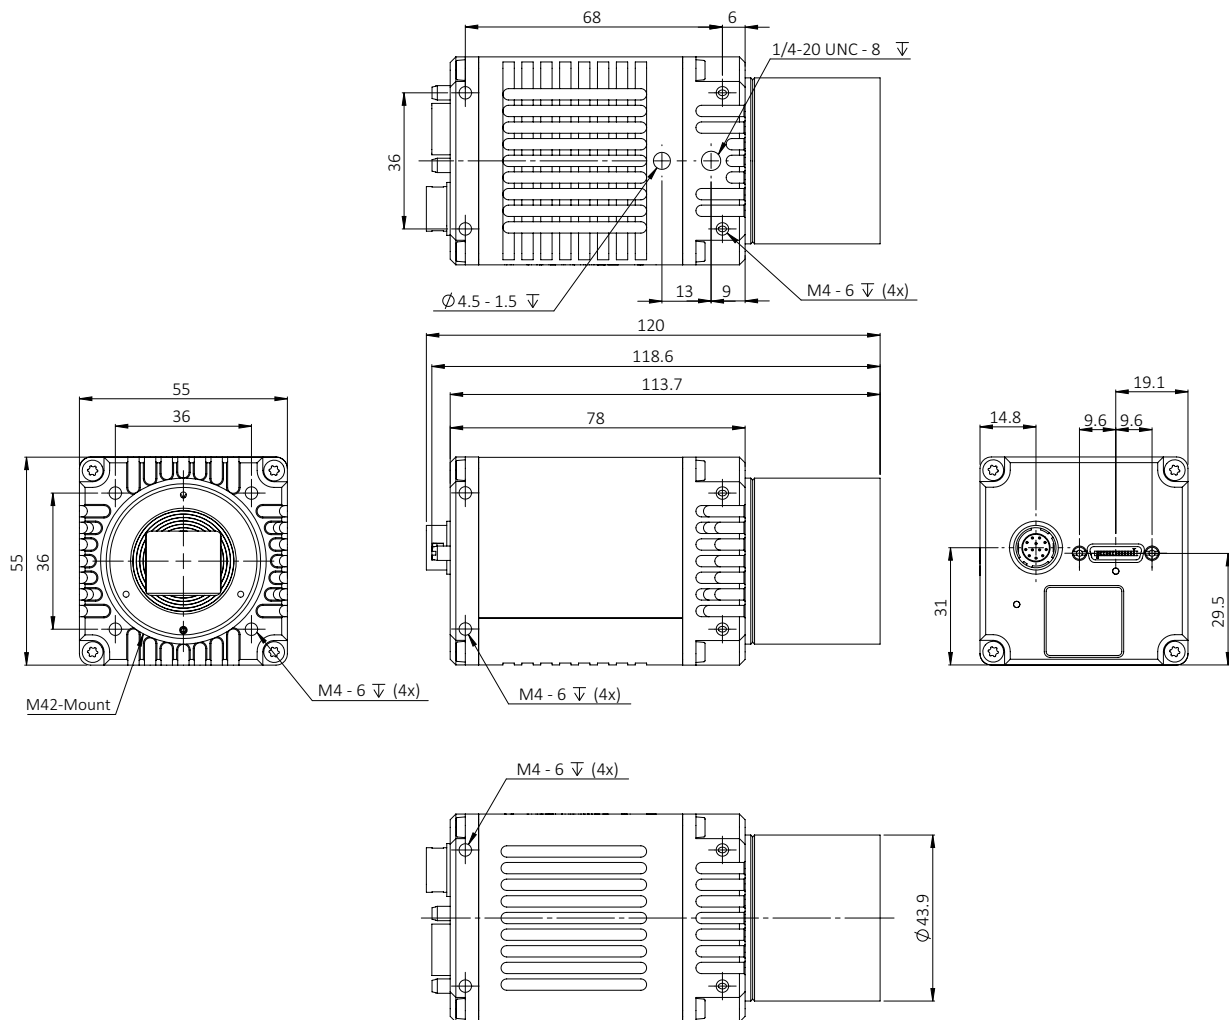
Goldeye CL-034 SWIR TEC1 dimensions with M42-Mount adapter
